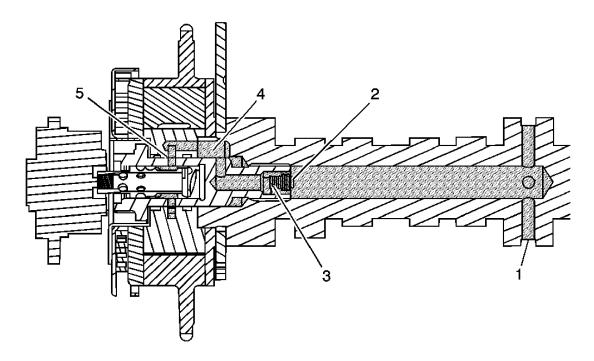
Cutaway View Of Actuator Courtesy of GENERAL MOTORS CORP.
